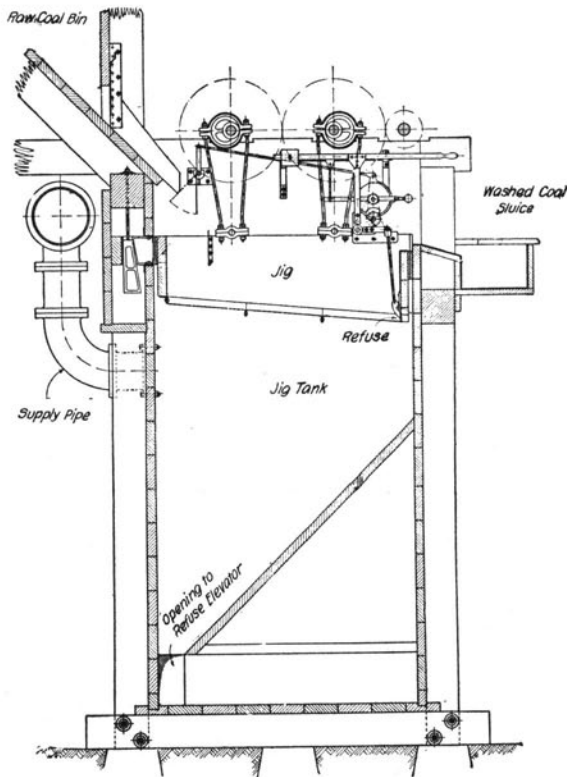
SECTIONAL VIEW OF AMERICAN JIG.
